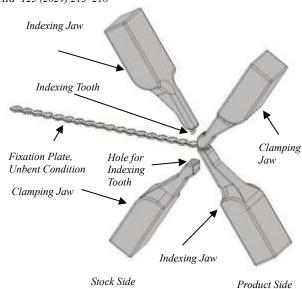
The jaw design used for bending and twisting the CMF plates.
